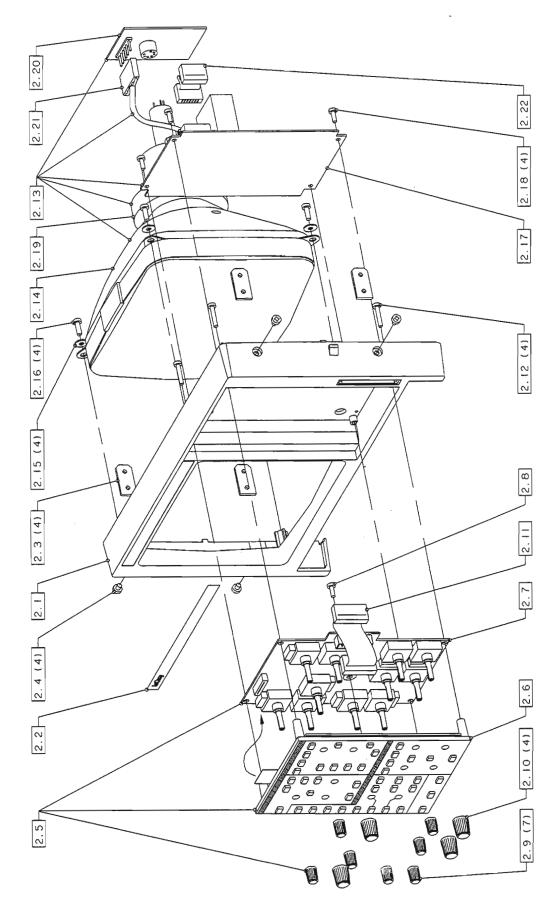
9374/M/L/TM Front Frame Exploded View
